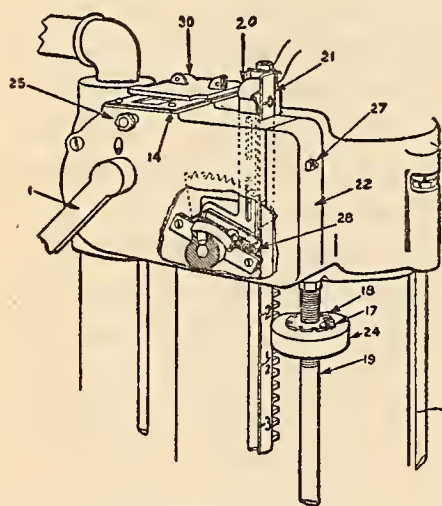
The stop on this pump is sealed by inserting a lead seal into a hole in the upper end of the pin passing through washer No. 17
